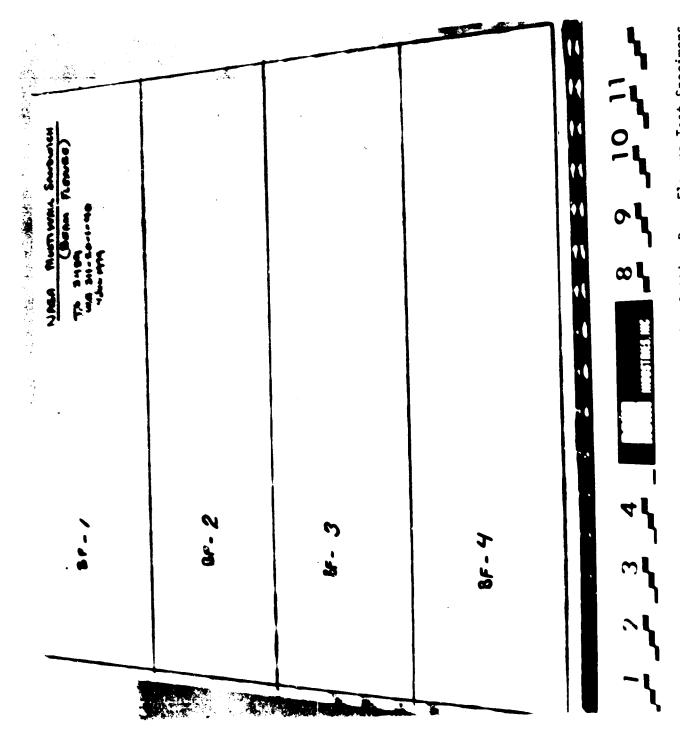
Beam Flexure Test Specimens Layout for Cutting Beam Flexure Test Specimens
